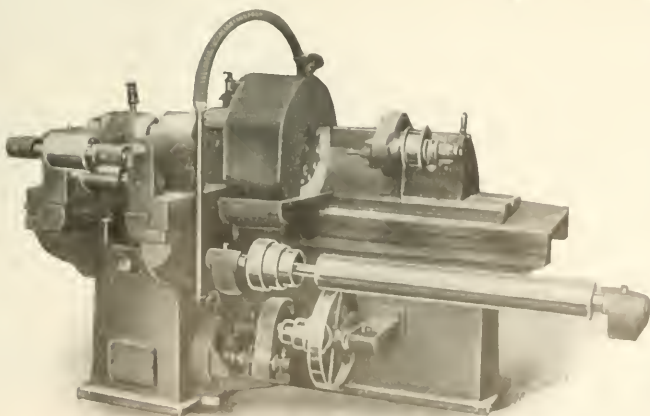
Rear View of Machine shown in Fig. 1, equipped for Belt Drive
